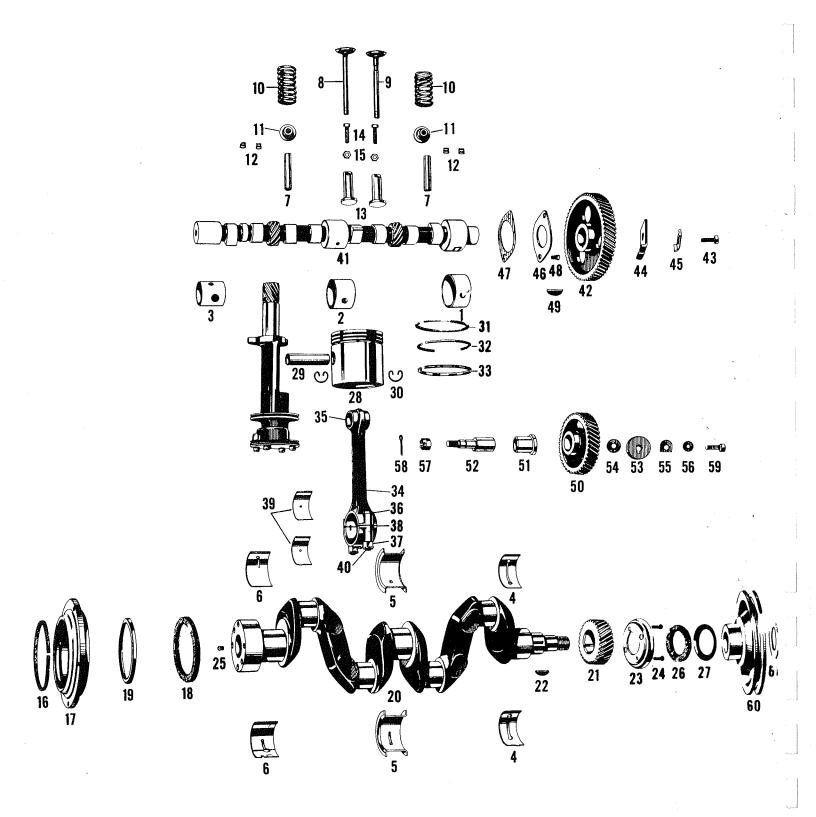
CRANKSHAFT, CAMSHAFT, VALVES, PISTONS AND GEARS
